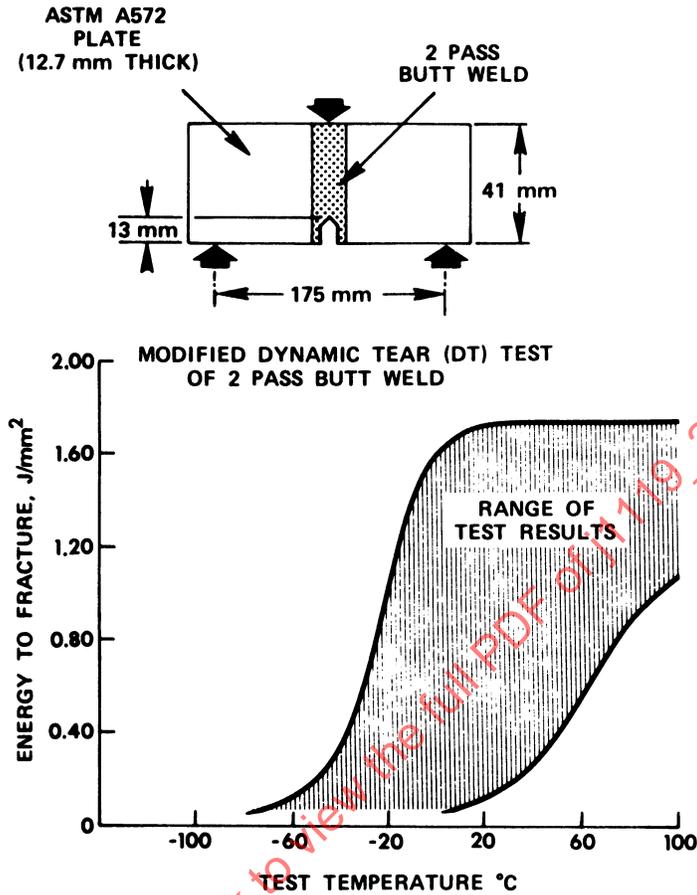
TOUGHNES OF WELD DEPOSITS
